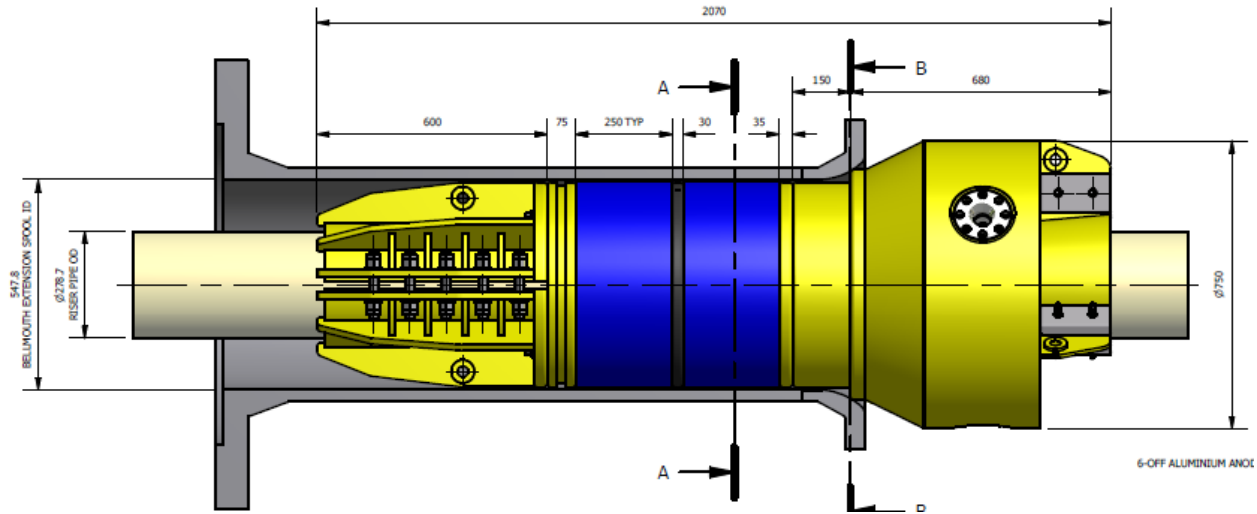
J-Tube seal with riser and pipeline sections [26]
